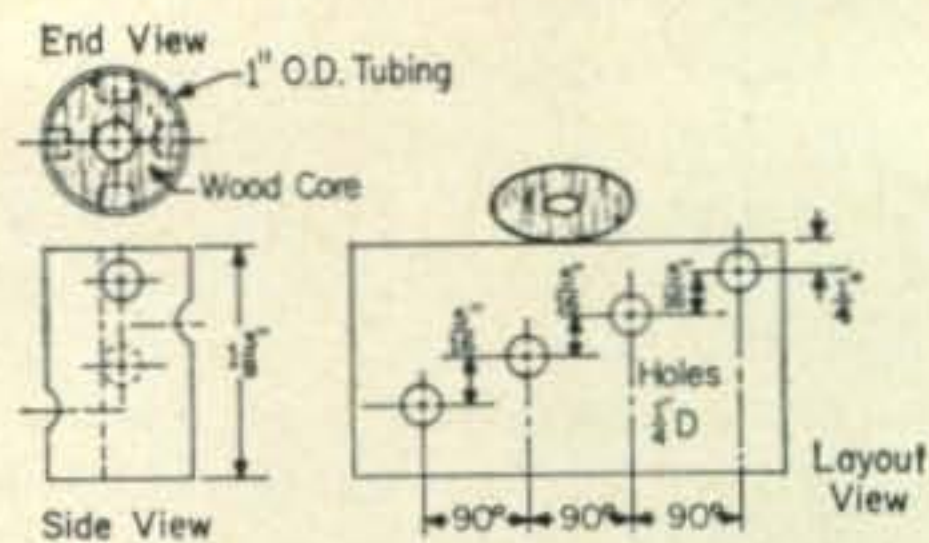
Commutator construction details. View (B) presents the 1" aluminum tube rolled out to illustrate the hole locations. The holes are located 90 degrees apart at the intersecting lines shown in the end view of (A).
